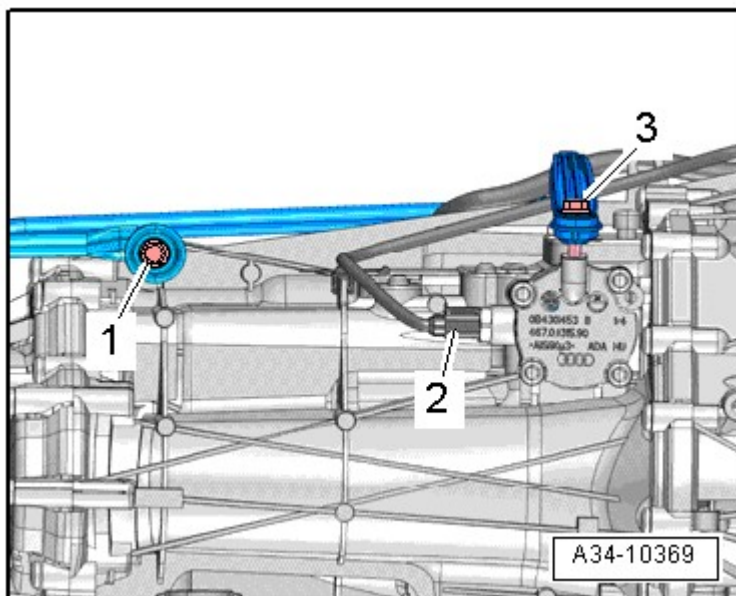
Identifying Electrical Connector -2- On Back-Up Light Switch -F4-
